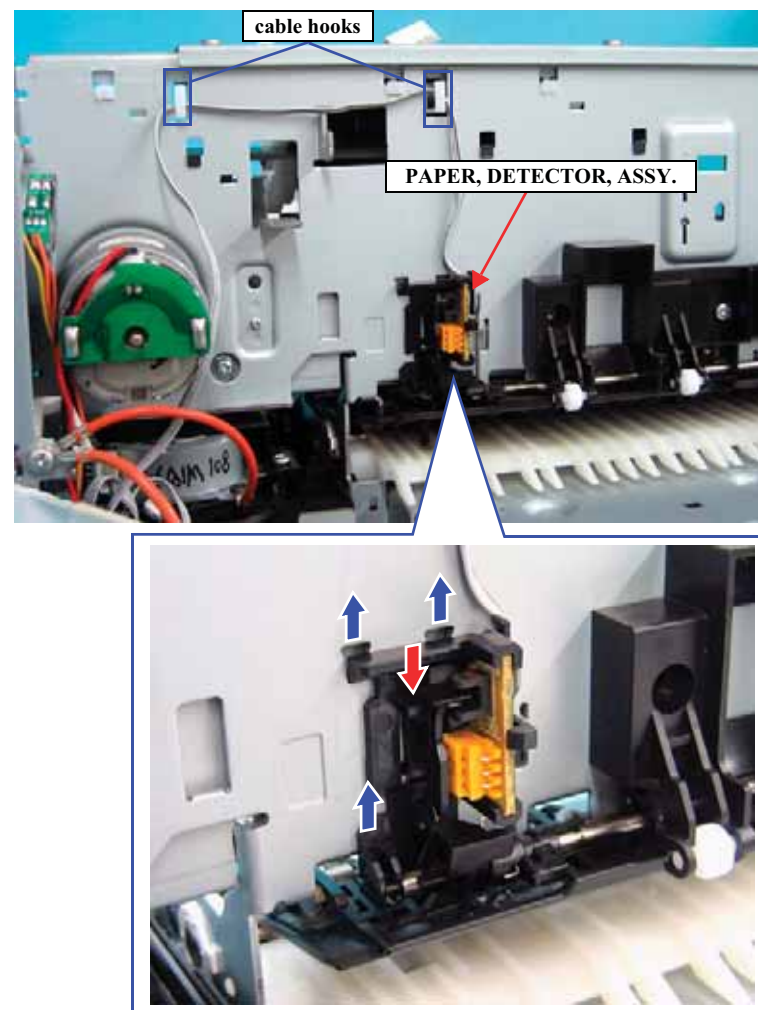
Removing the PAPER, DETECTOR, ASSY.
